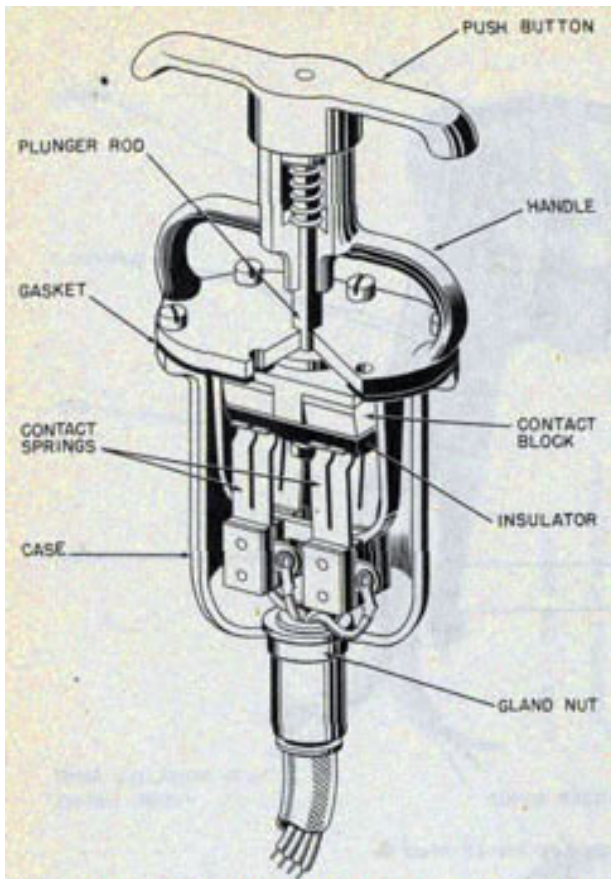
Cutaway of Portable Contact Maker Type M-16.
